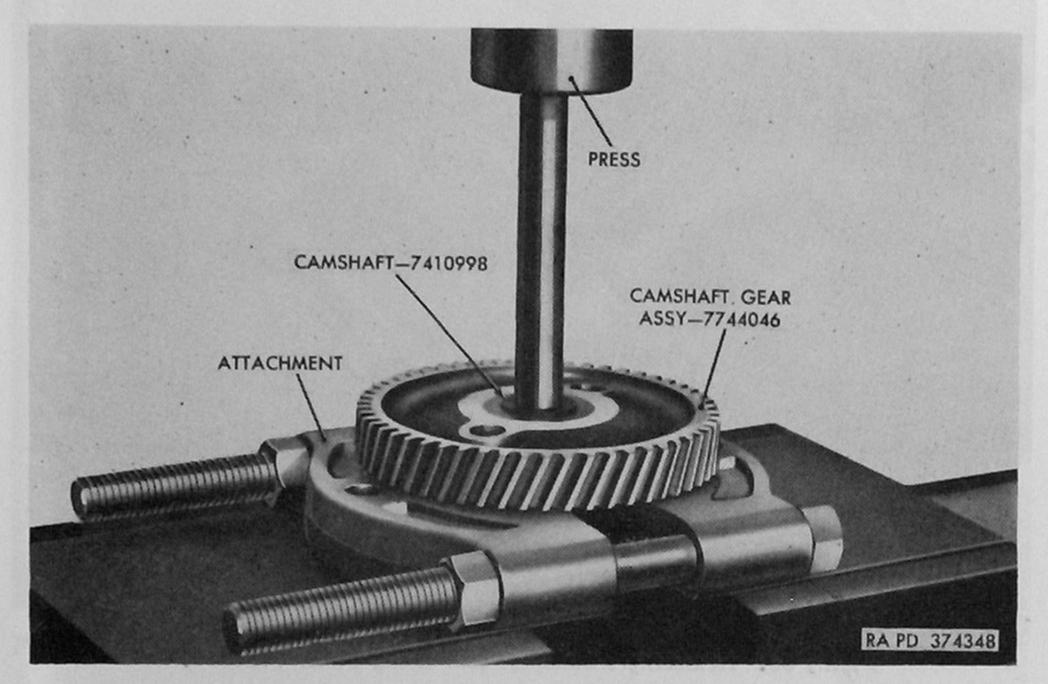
Removing camshaft gear from camshaft (early engine assembly 7411599 shown).
